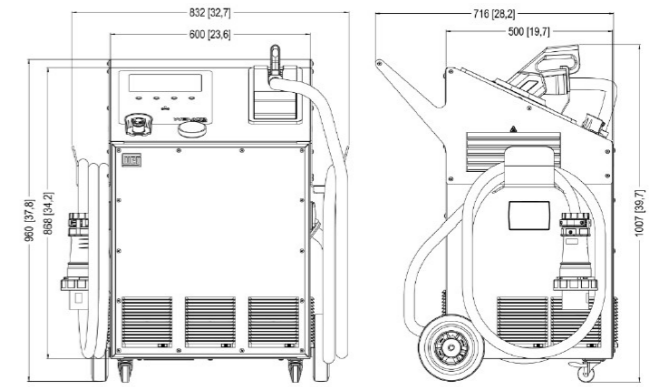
WEMOB-STATION dimensions in millimeters [mm] and inches [\"/>
